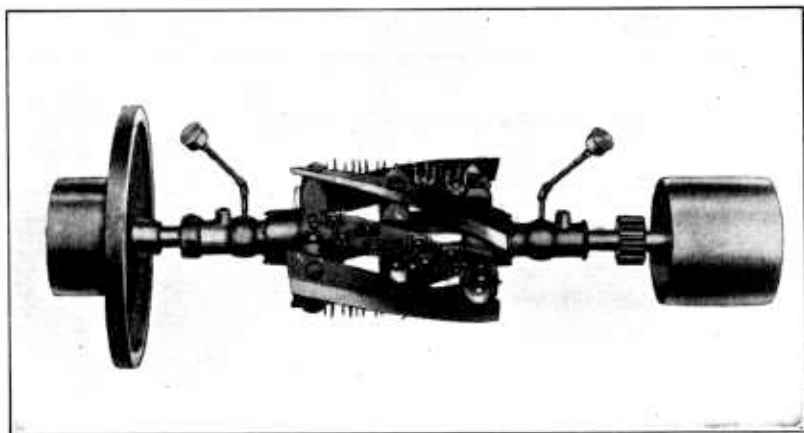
A combination head equipped with four knives and four shredder bars. It is possible to equip this type of head with 2 or 4 knives, 2 or 4 shredder bars, or combination of 2 or 4 knives with 2 or 4 shredder bars
